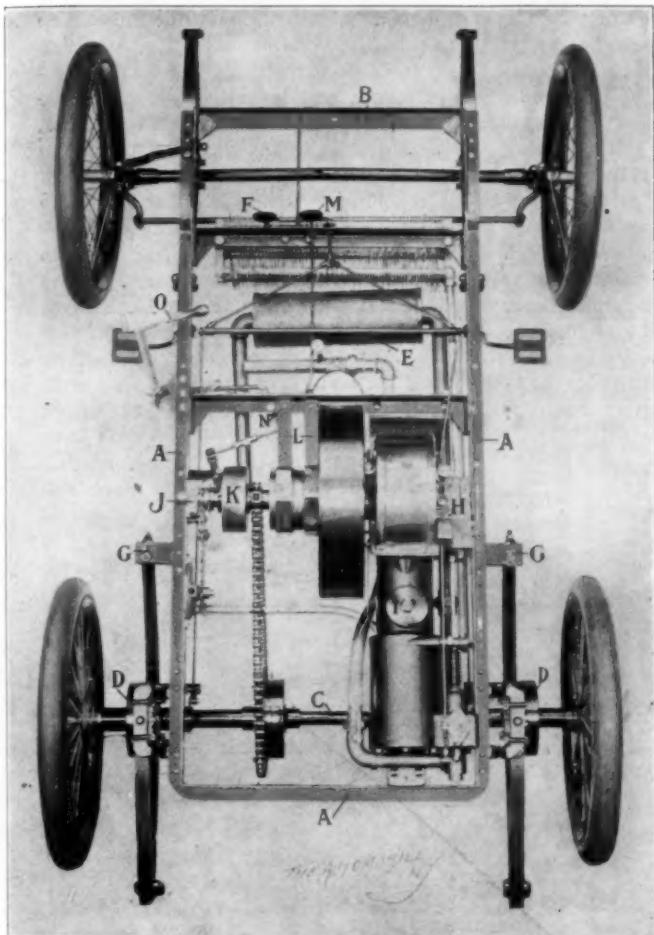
PLAN OF RUNNING GEAR AND MACHINERY.
